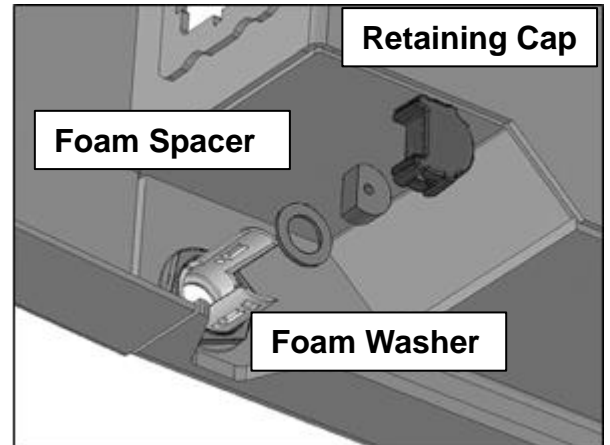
Disassemble factory bumper to remove lights, plugs, sensors and harness
